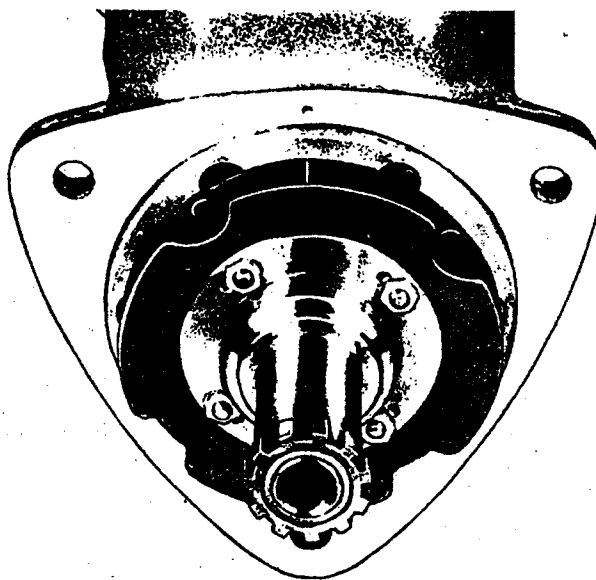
Draw Pencil Line on Coupling in Register With Prick Punch Mark on Mounting Flange
